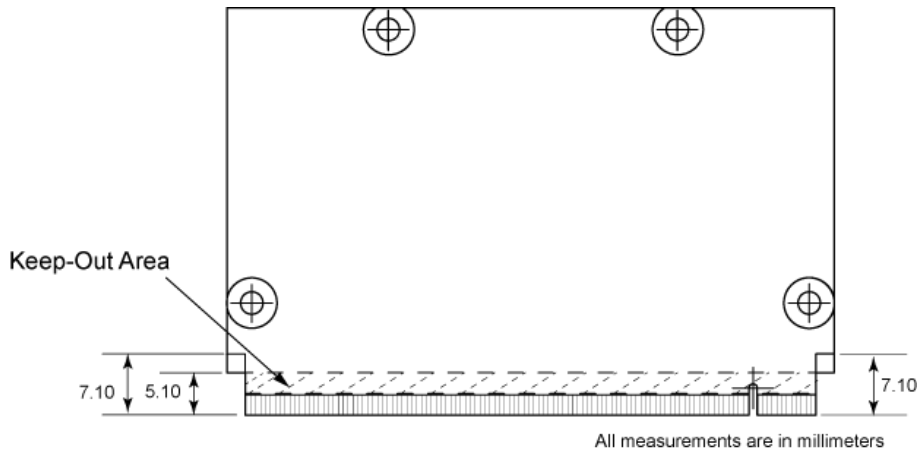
Qseven® Connector and Cooling Plate Keep-Out Area
